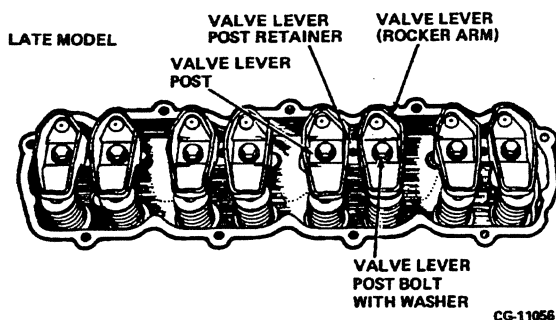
Valve Lever (Rocker Arm) Assembly
